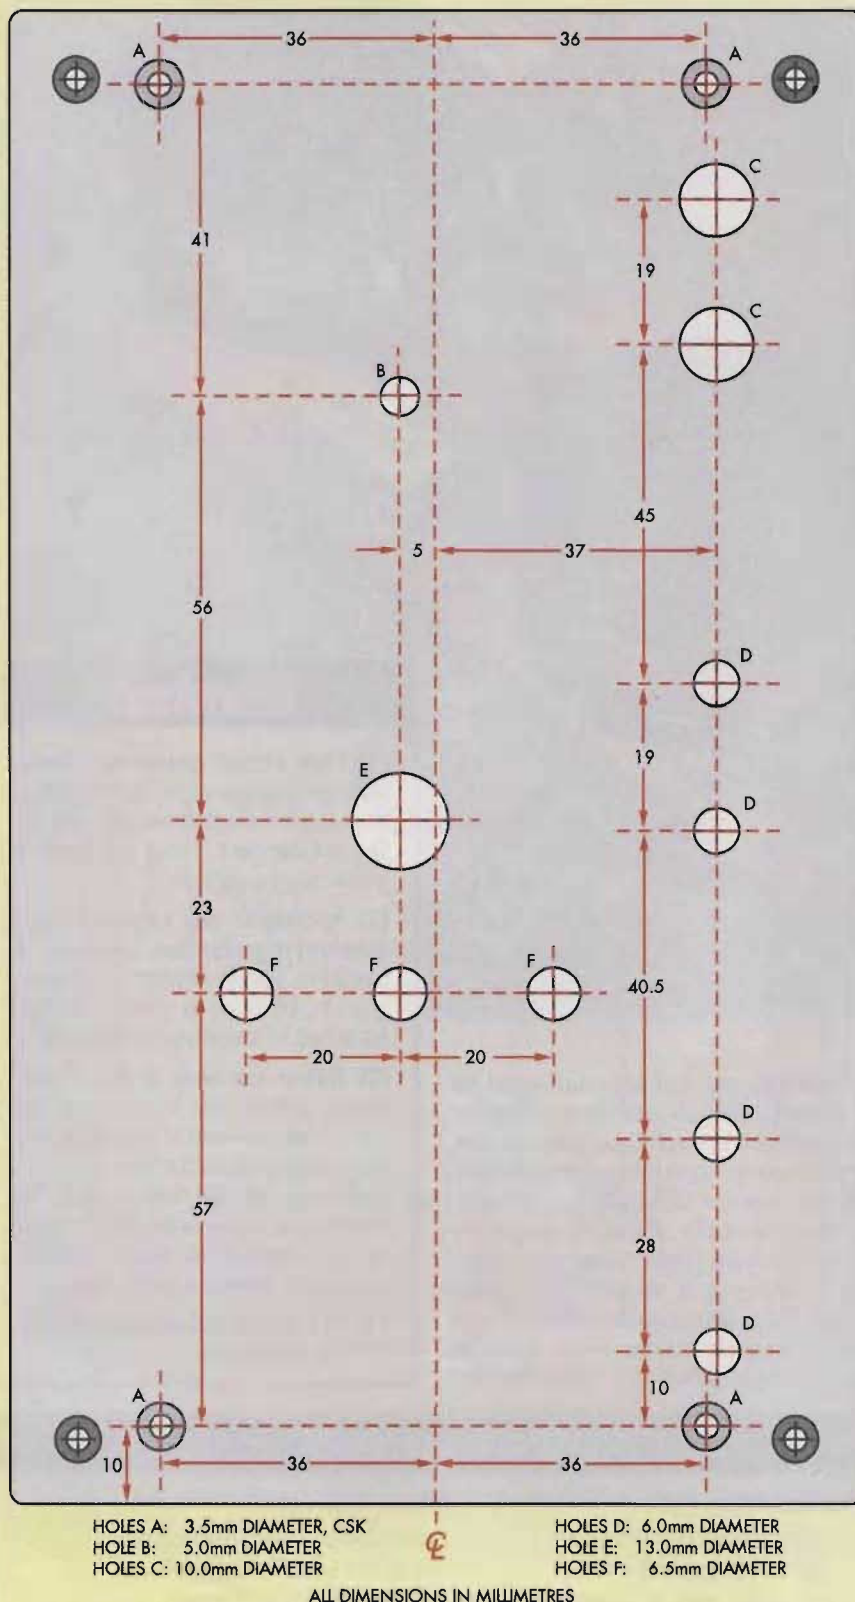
the drilling template for the front panel (ie, the lid of the case). Drill small pilot holes first & use a tapered reamer to make the larger holes.
